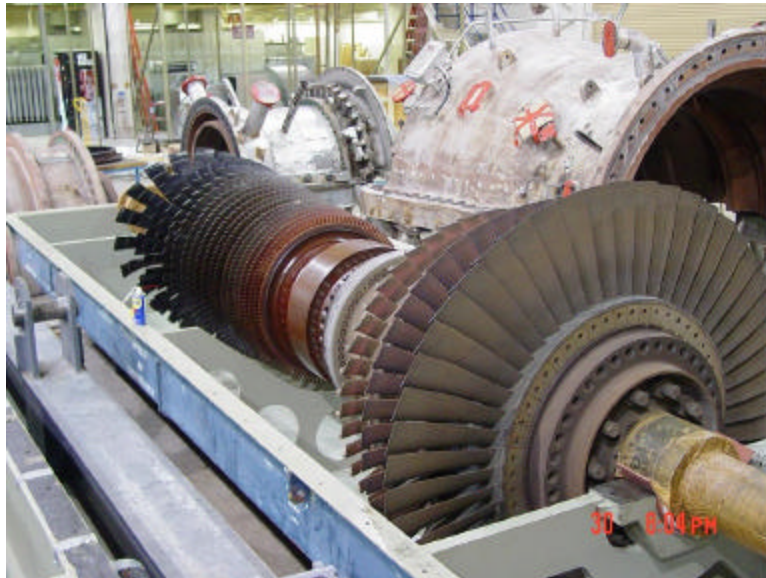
, Compressor and Turbine Blades on a Single Rotor. (UT Power Plant)
